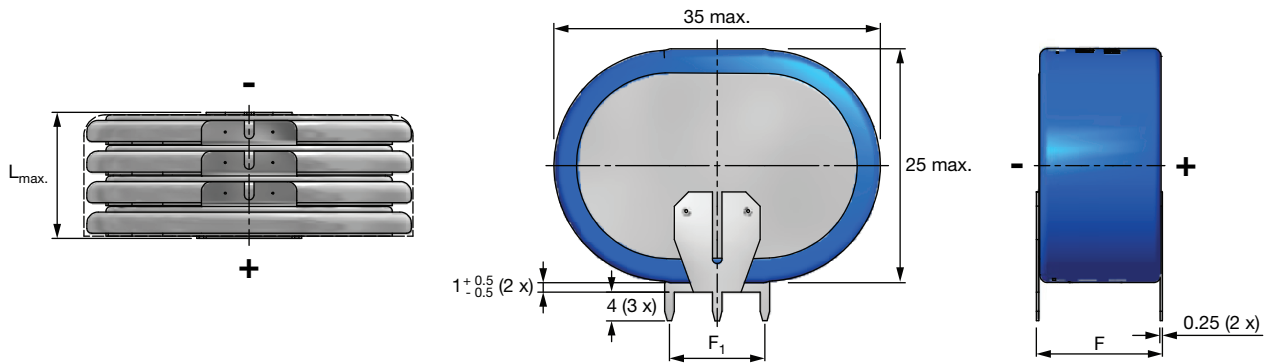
Form G: Stacked Through Hole Oval (PCBD)
